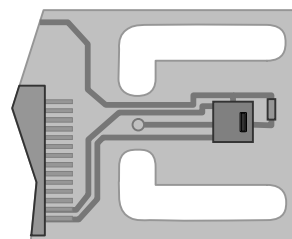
Top view of example of mounted SHT21S with slits milled into PCB to minimize heat transfer.
